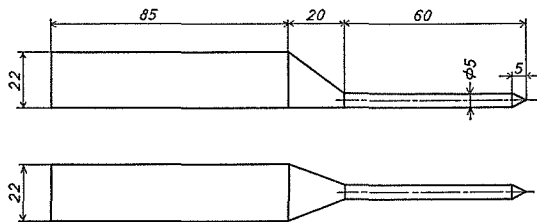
Dimensions of the single crystal prepared by the soft mold technique.
